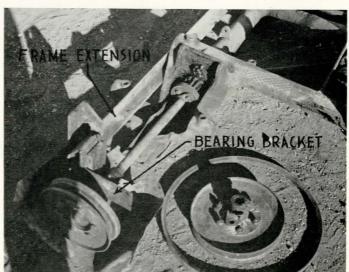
The pulley end of the drive shaft rotates in a self aligning one-inch roller bearing which is supported by an adjustable bracket as in Figure 8. This bracket is mounted on a support in such a manner as to provide an up and down adjustment to permit the necessary belt adjustment. In all cases make supports extra strong as all mowers have a tendency to vibrate.
